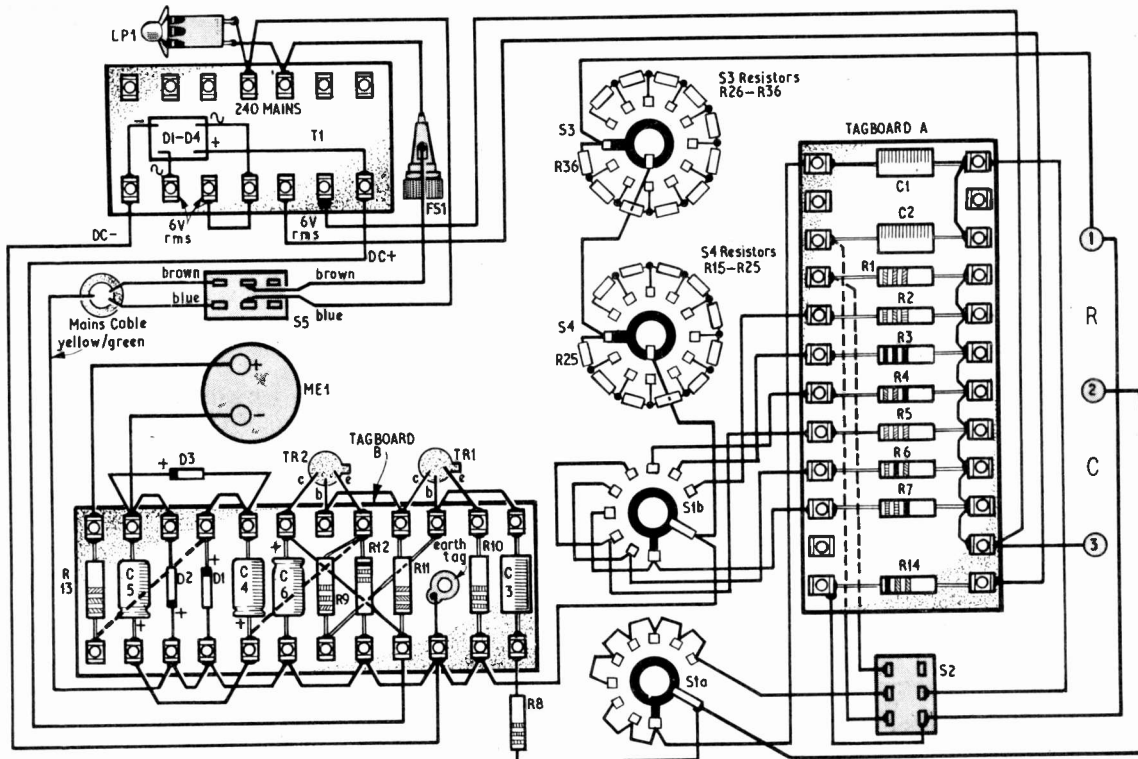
Wiring diagram of the bridge illustrating the use of tag strips. Remember that S1a and S1b are mounted on the same shaft
